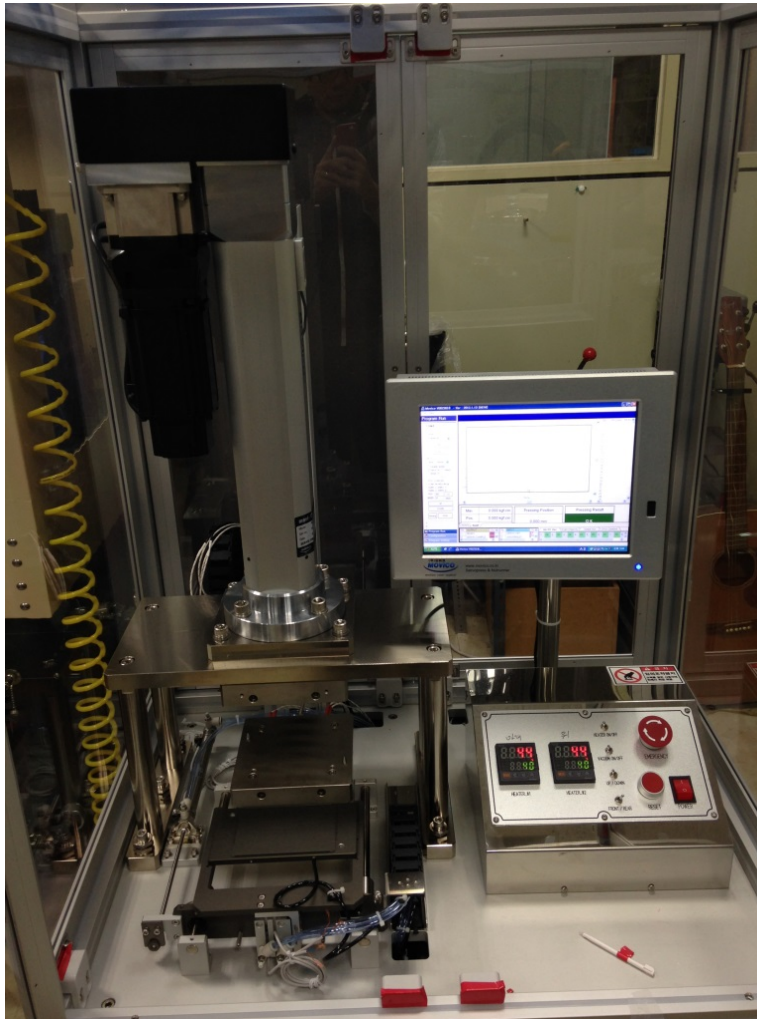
Developed hot embossing machine. This machine consists of servo press, wafer loading jig, two hot plates, and control PC.
